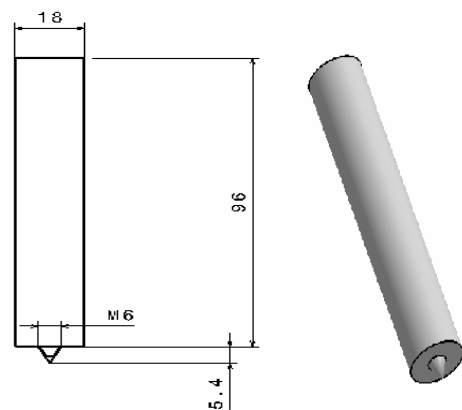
2D & 3D models of FSW tool with Threaded Cylindrical Tool Pin
